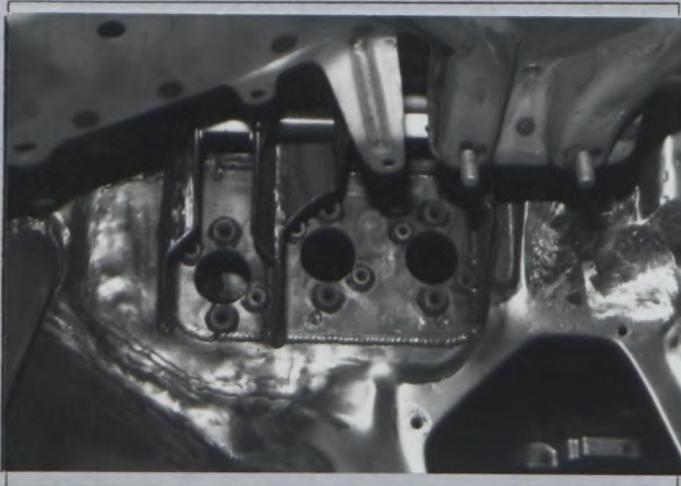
FLY OFF HANDBRAKE ASSEMBLY
